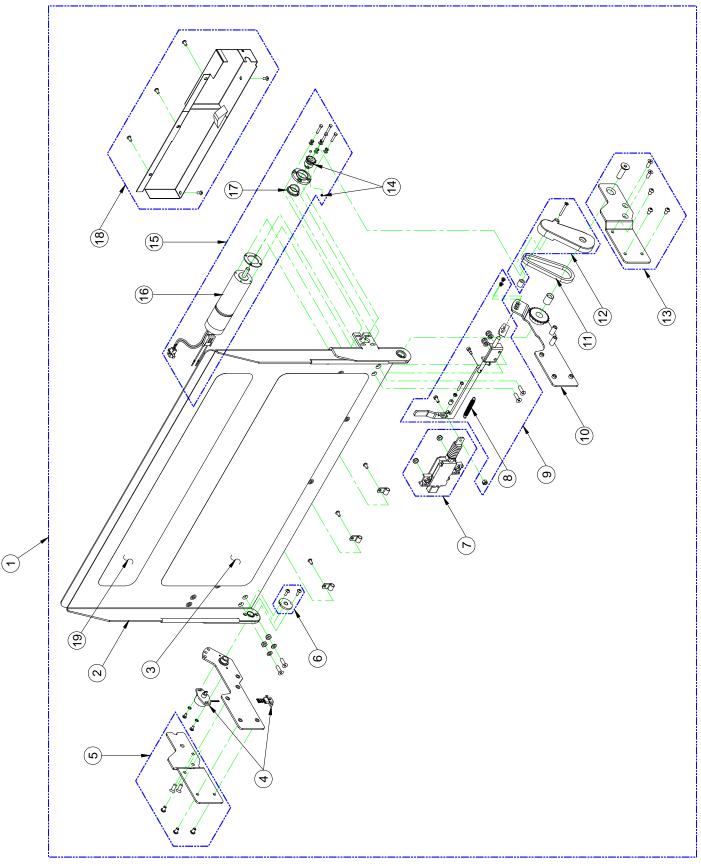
PLATFORM BRIDGEPLATE ASSEMBLY
